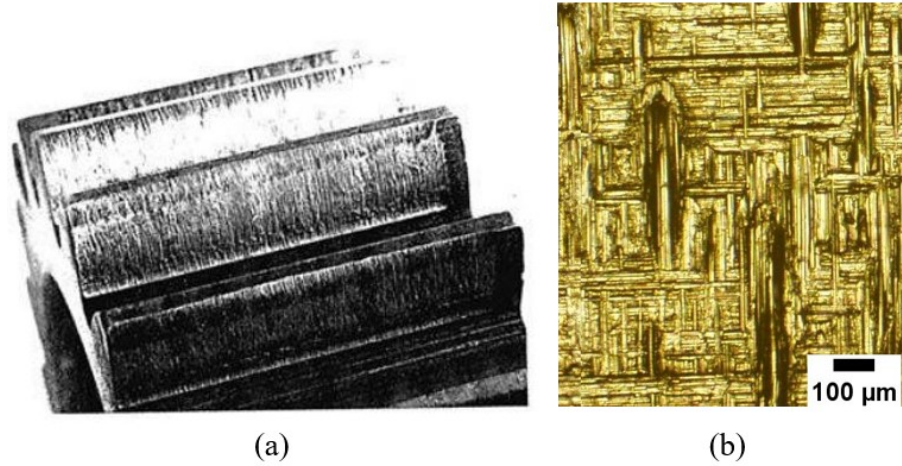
Abrasive wear on gear teeth. (a) A macroscopic view [28]. (b) Microscopic furrows in parallel. Horizontal lines are manufacturing marks.
